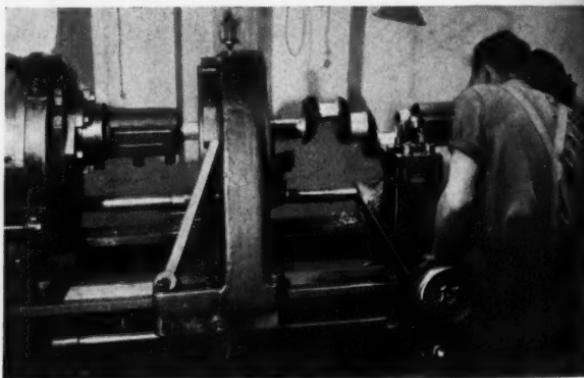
Crankshafts are turned in a special crankshaft lathe.
